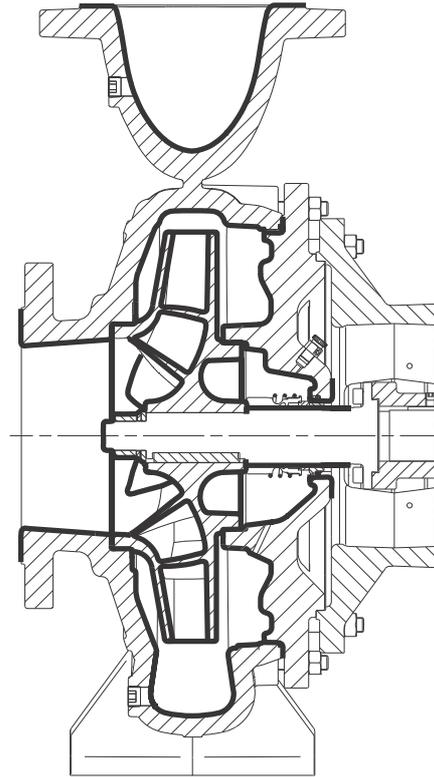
Sectional view of pump coated for chemicals up to 60 °C
